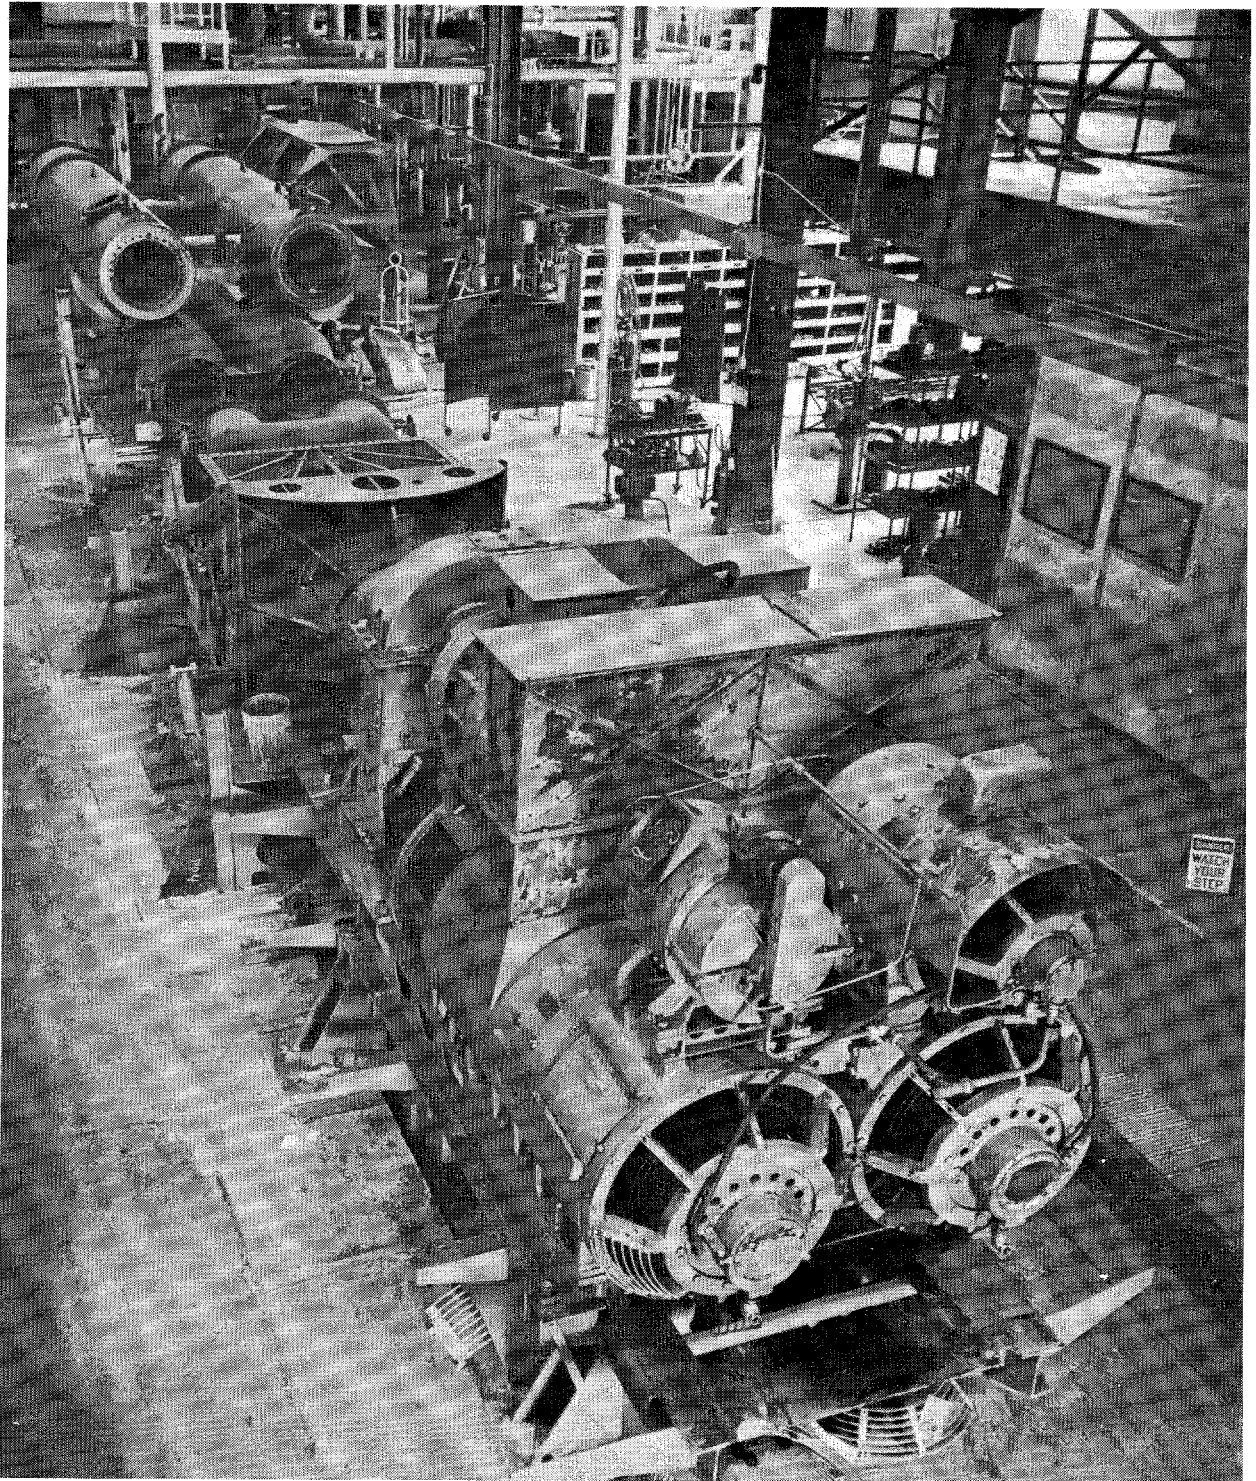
View of Partly-Assembled Coal-Fired Gas Turbine Plant.
